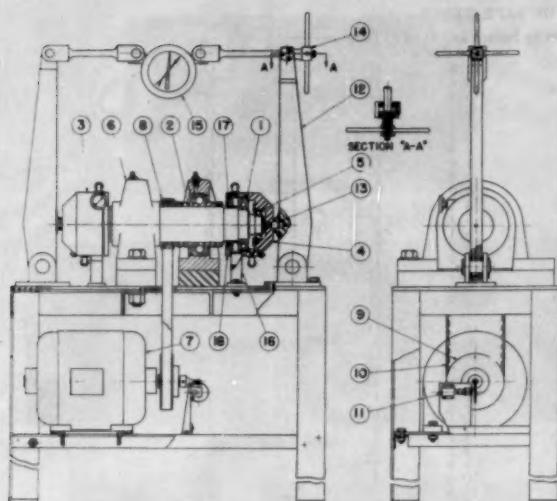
CROSS-SECTIONAL ASSEMBLY OF BEARING TESTER
